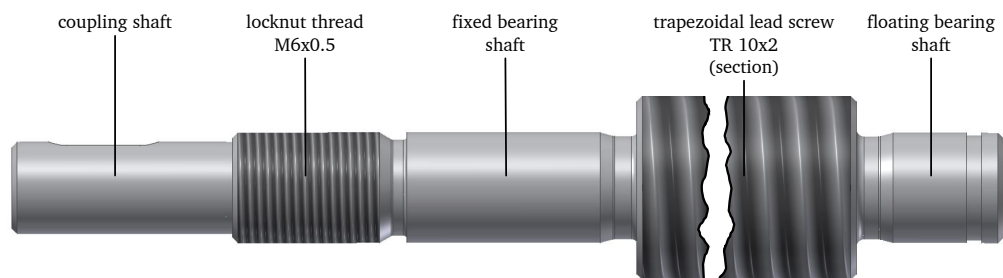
CAD model of lead screw (short section) with shaft on either side
